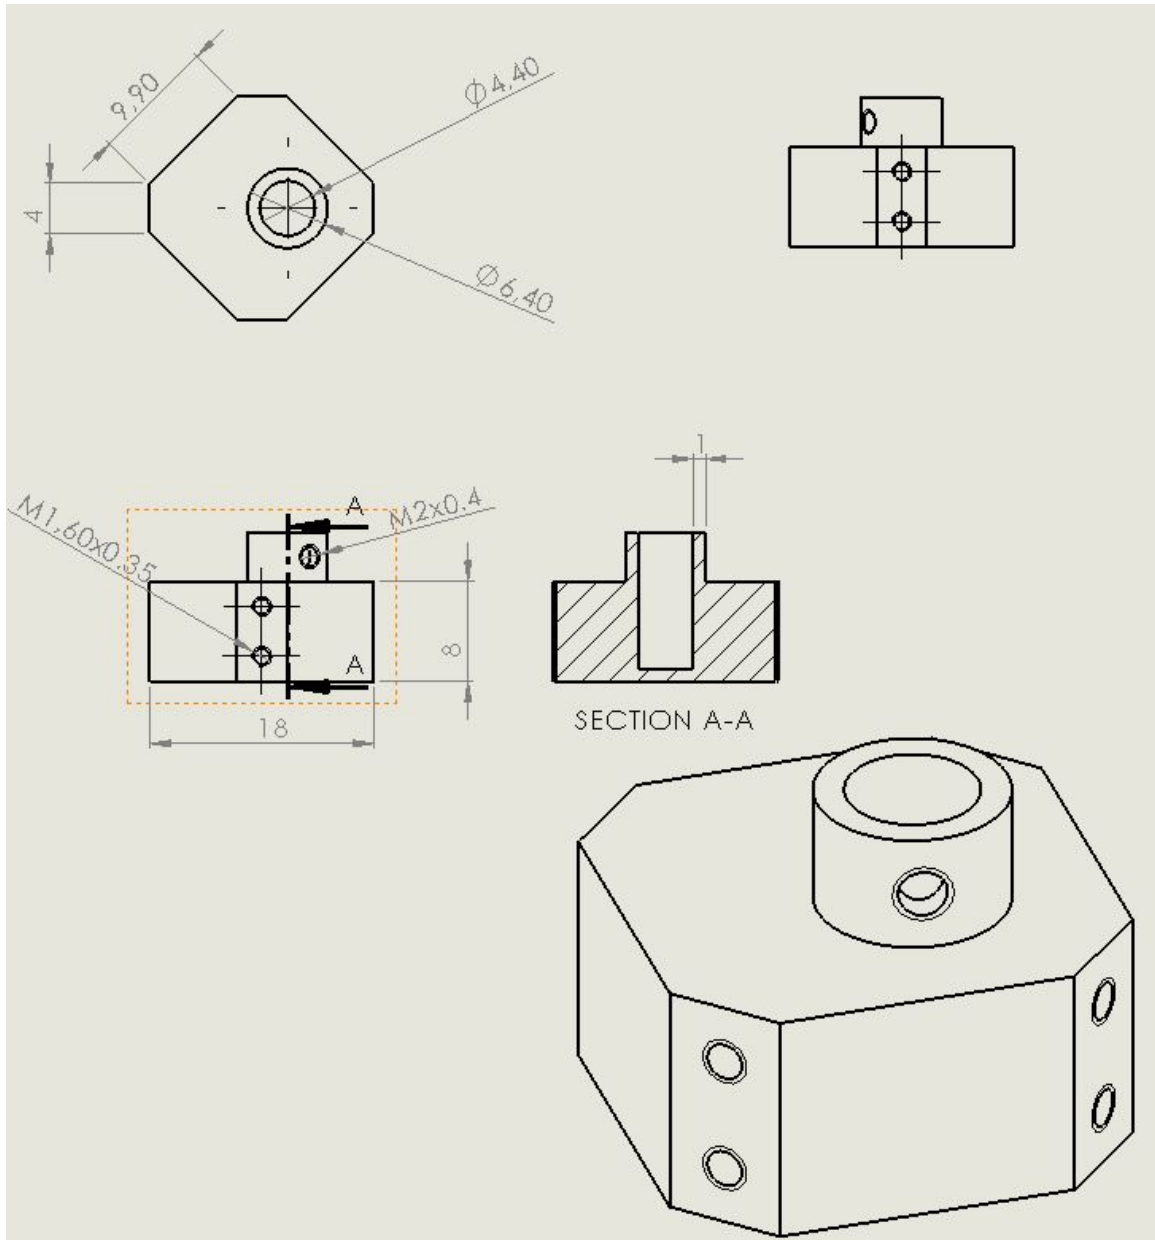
Solidworks model drawing of the Whispering Gallery Mode Resonator base plate used in the inner frame of the cryostat holder
